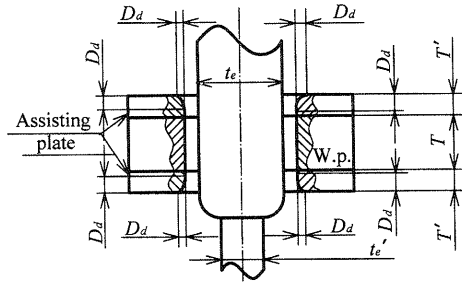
Schematic explanation micro-square-groove machining by using formed stepped electrode and assisting plate
